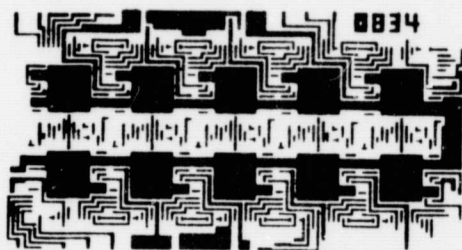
Tape carrier for Type 342 devices shown superimposed over matching bumped wafer
